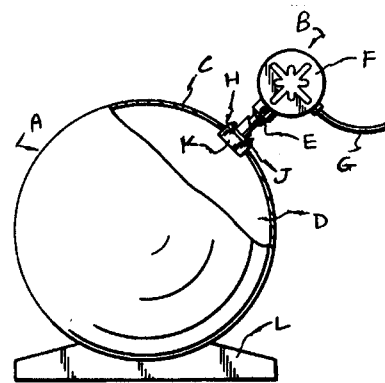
A typical example of the subject matter. A- Pressure vessel; B - Lighting unit; C - Pressure vessel wall; D - Vessel interior; E - Light rod or pipe; F - Light source; G- Power supply cable; H - Fixture or flange retainer; J, K - Mountingbracket; L - Vessel support
